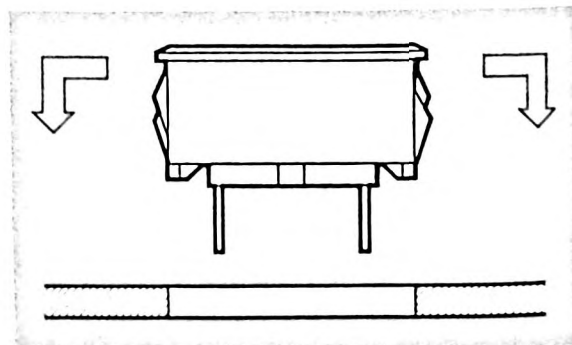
Installation of the Light Bar/Panel Mount Assembly into a Front Panel
